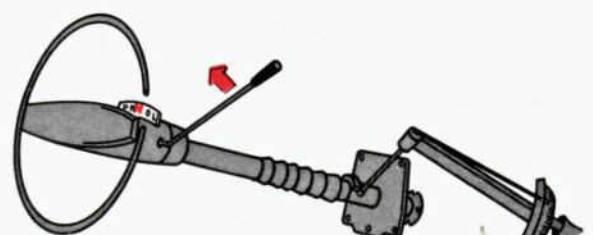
B—Installing Over Actuator In Column Type “B” Switch
